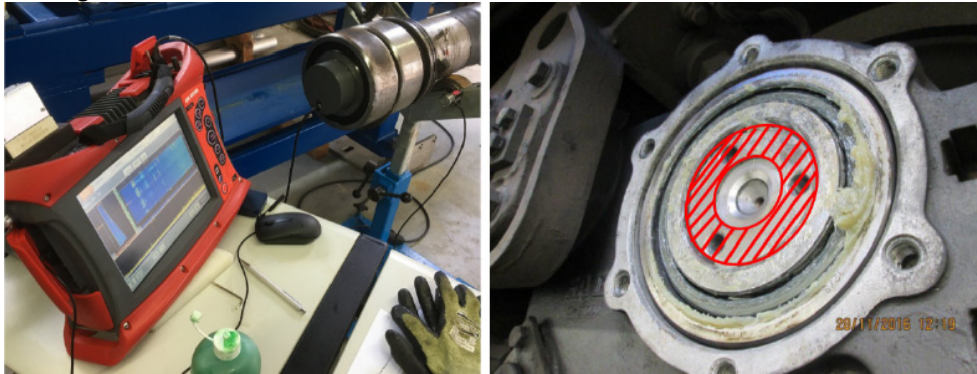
Wheelset axle testing with PAUT with a compact scanner (left) and view of the axle end with hatched coupling area (right)
